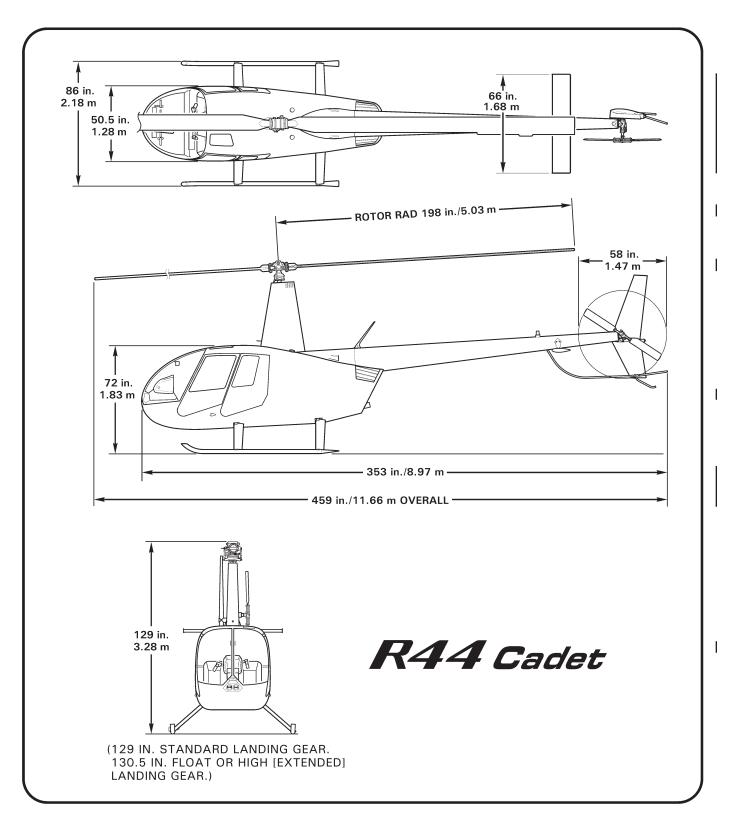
EXTERNAL DIMENSIONS (F004-2 empennage installed)
